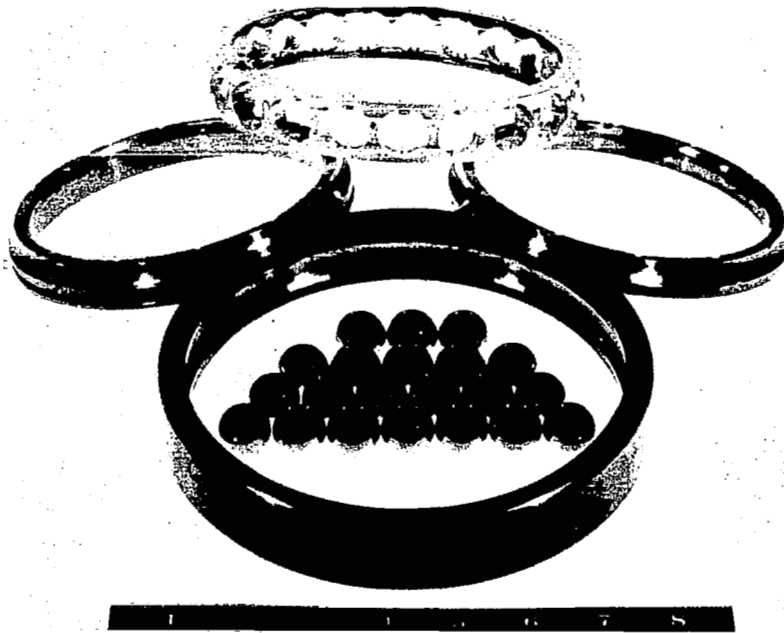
Overall View of Drilled - Ball Bearing S/N 2552A-2 After 23.52 Hours
